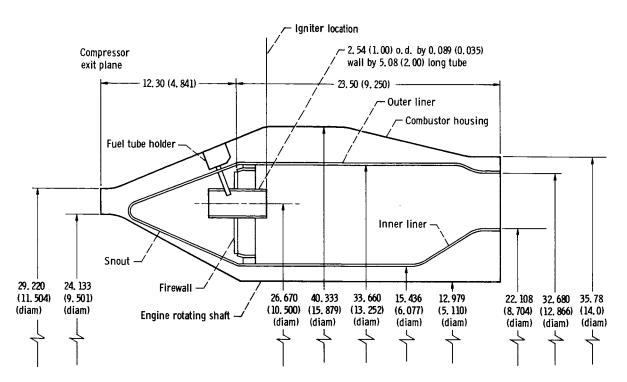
Air-atomizing combustor. Dimensions are in centimeters (in.).
